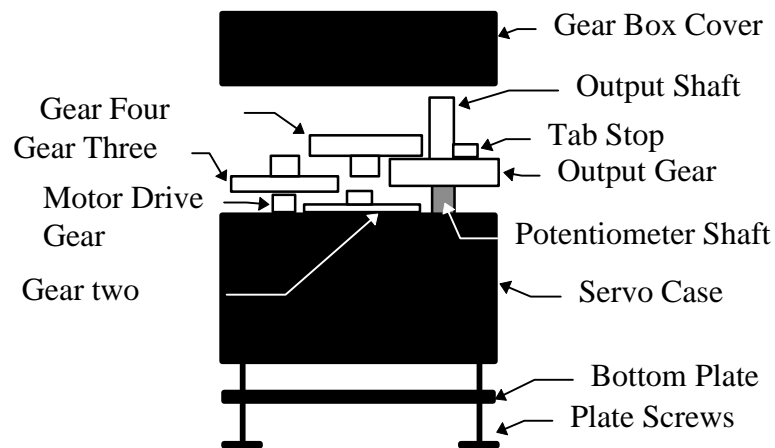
Disassemble by removing four lower screws. Cut away the tab stop, remove potentiometer tab inside *Output Gear*, set potentiometer shaft at center setting and replace cover.
